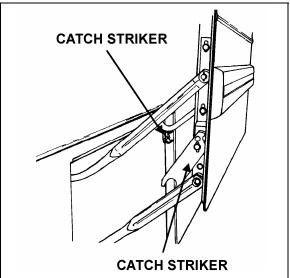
BAGGAGE DOOR CATCH STRIKER
